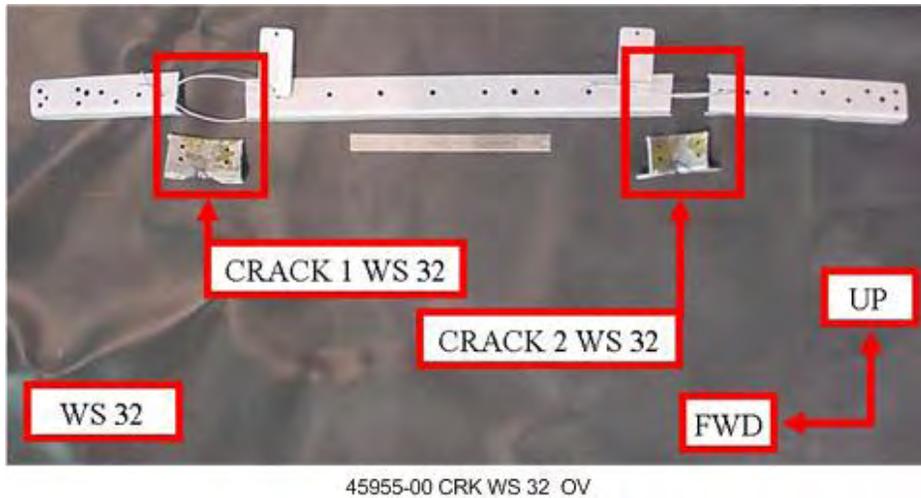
Location of Cracks 1 and 2 on the Left Wing Main Gear Door Angle WS 32
